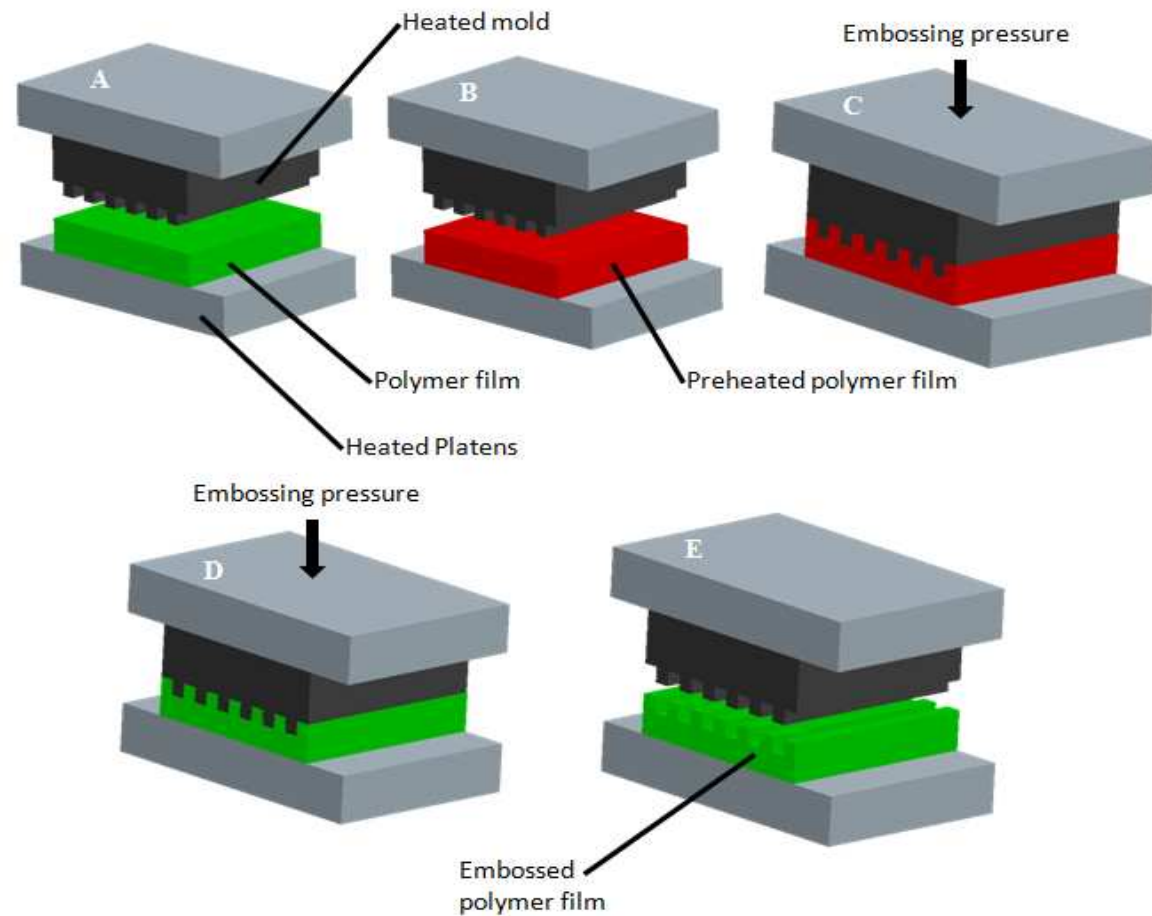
Steps in conventional hot embossing: A – Mold preheating (non-isothermal embossing); B – Mold and polymer preheating (isothermal embossing); C – Embossing and holding stage; D – Cooling stage; E – Demolding stage
